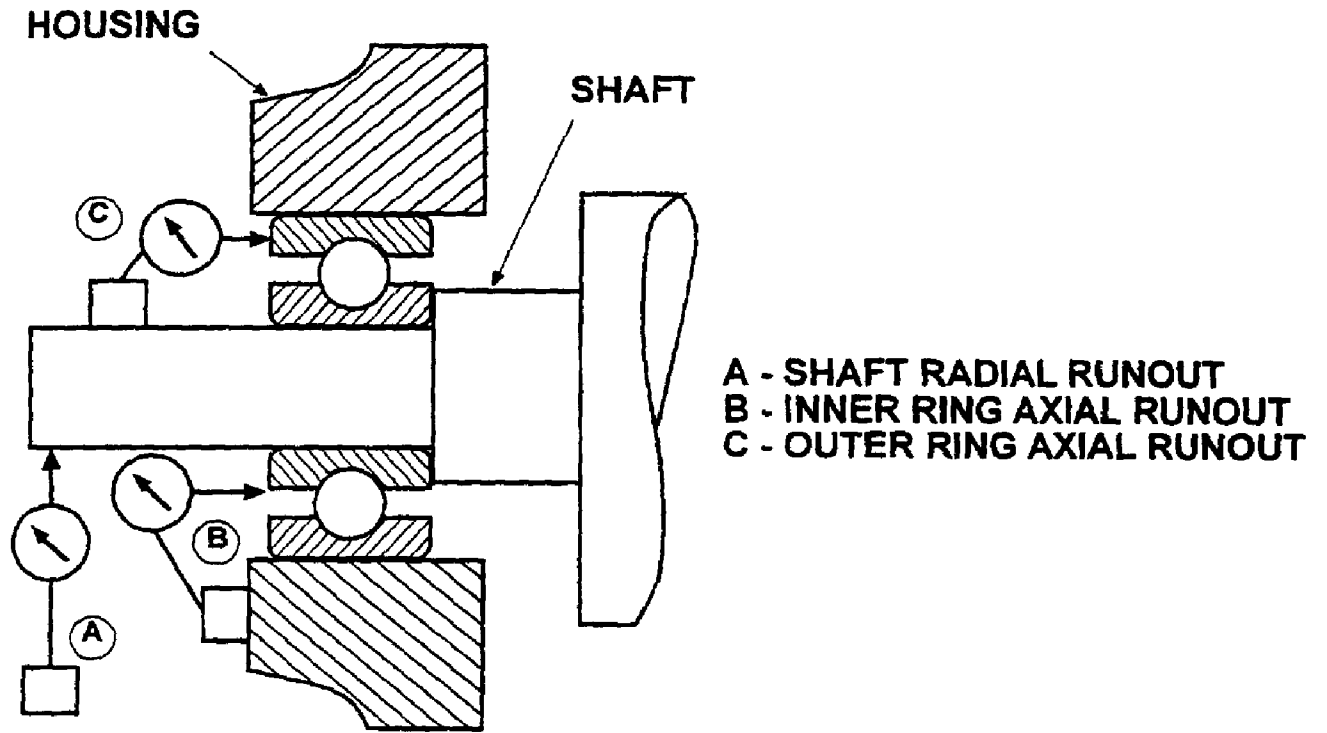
Measurement Location for Determining Bearing Axial Runout and Shaft Radial Runout
